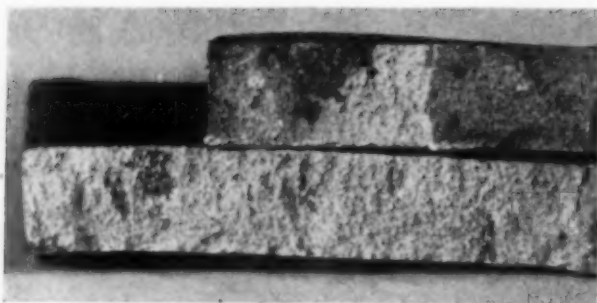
Severe Cases of High Temperature Deterioration, as Shown by the Blackened Spots Inside the Casting. (Darker zone in the right of upper piece is a hot-short crack)
